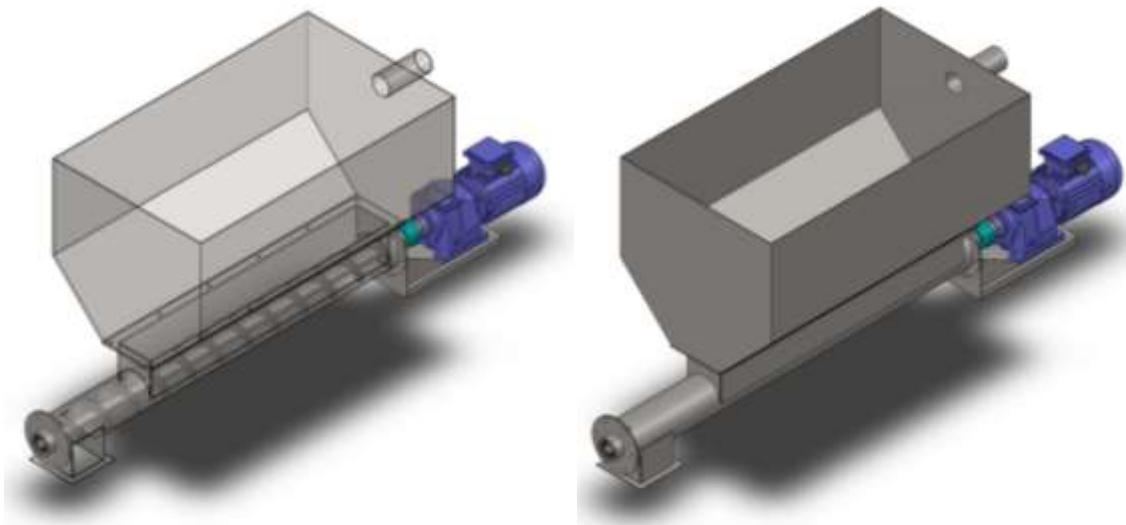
AutoCAD drawing of welded box and screw conveyor assembly
